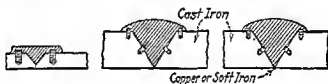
Cross Sections of Studded Joints, Showing Use on Thin and Thick Materials and the Use of a Copper or Soft Iron Strip at Bottom of Vee.
